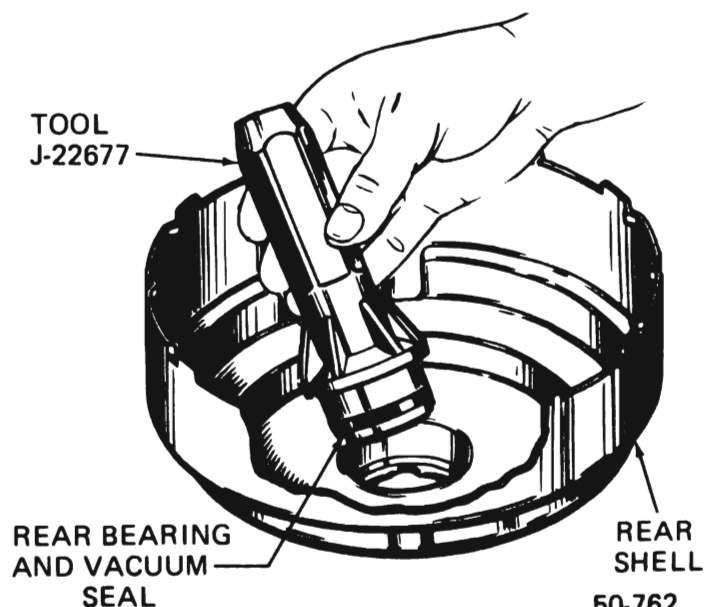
Installing Rear Bearing and Vacuum Seal
